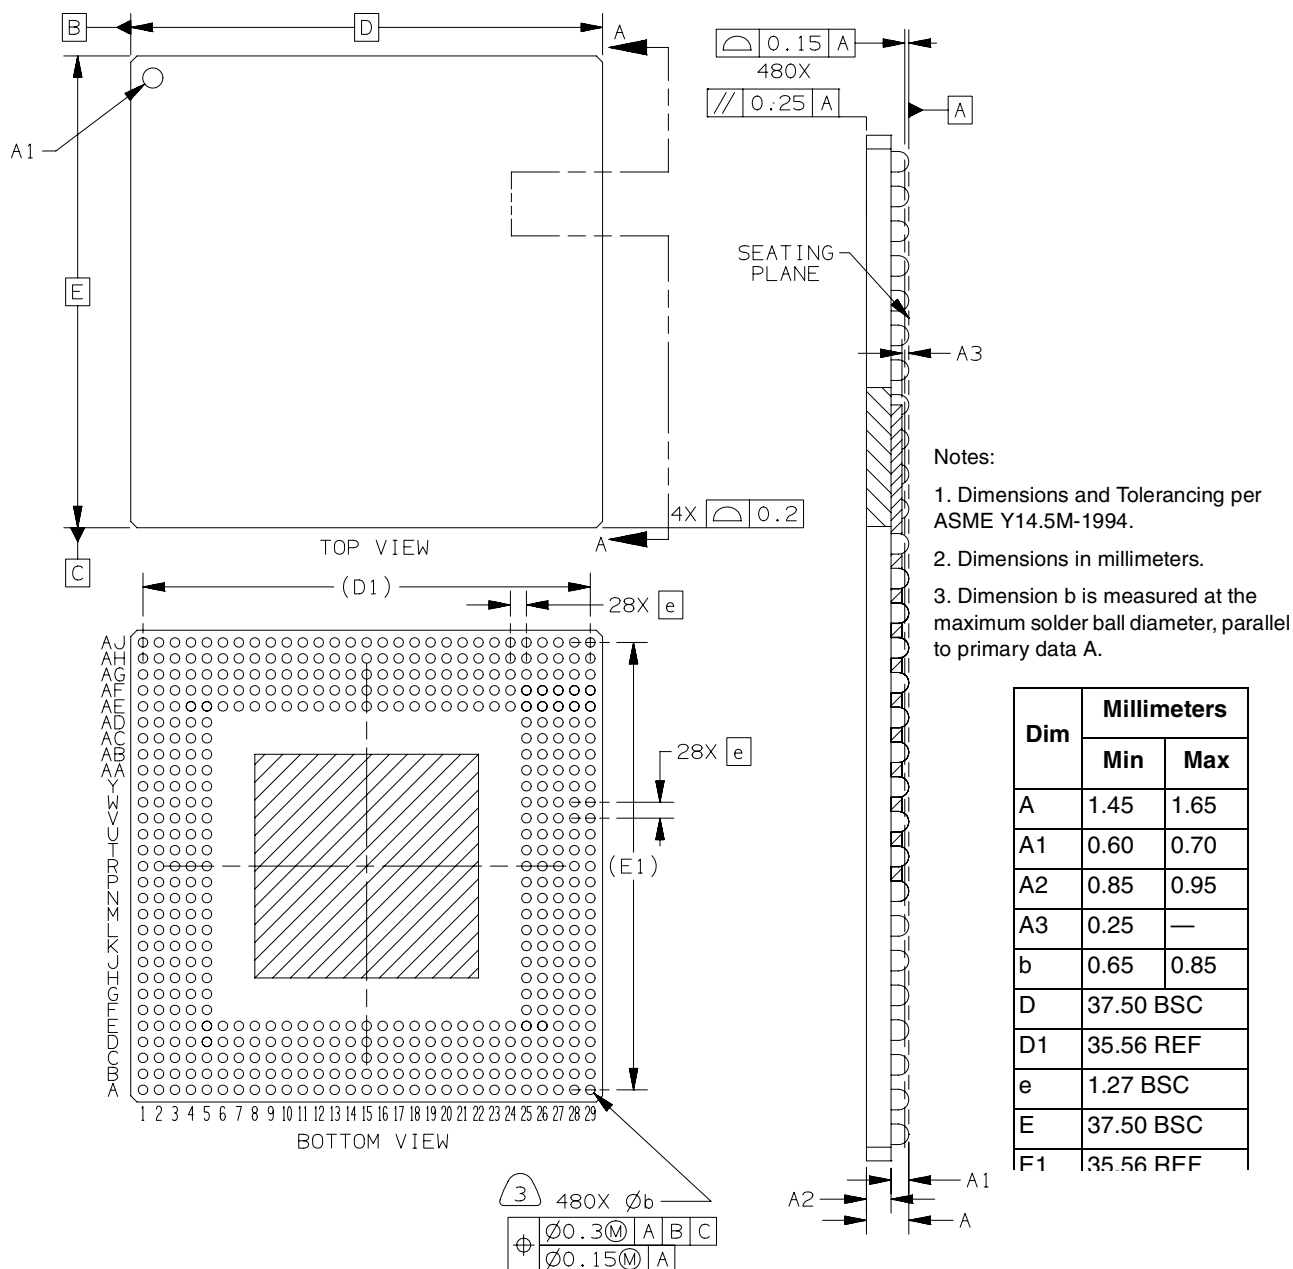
Mechanical Dimensions and Bottom Surface Nomenclature
